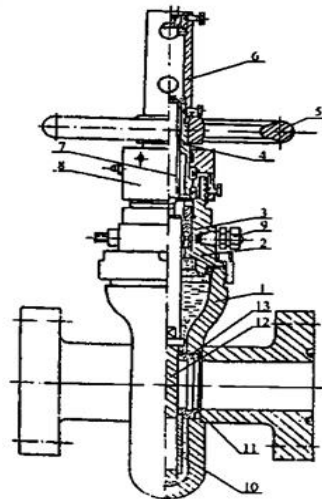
Direct-flow gate valve ZM-65 × 21 with a metal-to-metal gate: 1-body; 2-case cover; 3-sealing cuffs; 4-way nut; 5-flywheel; 6-casing; 7-spindle; 8-bearing cover; 9-ball valve; 10 shields; 11-disc spring; 12-gate; 13-saddle.
